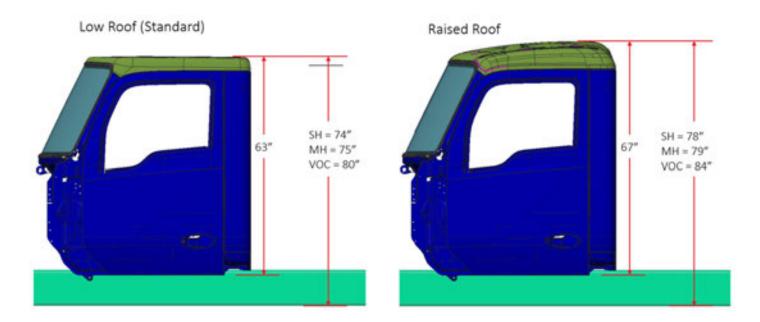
Low Roof vs. Raised Roof Cab Height 2.1m Medium Duty
